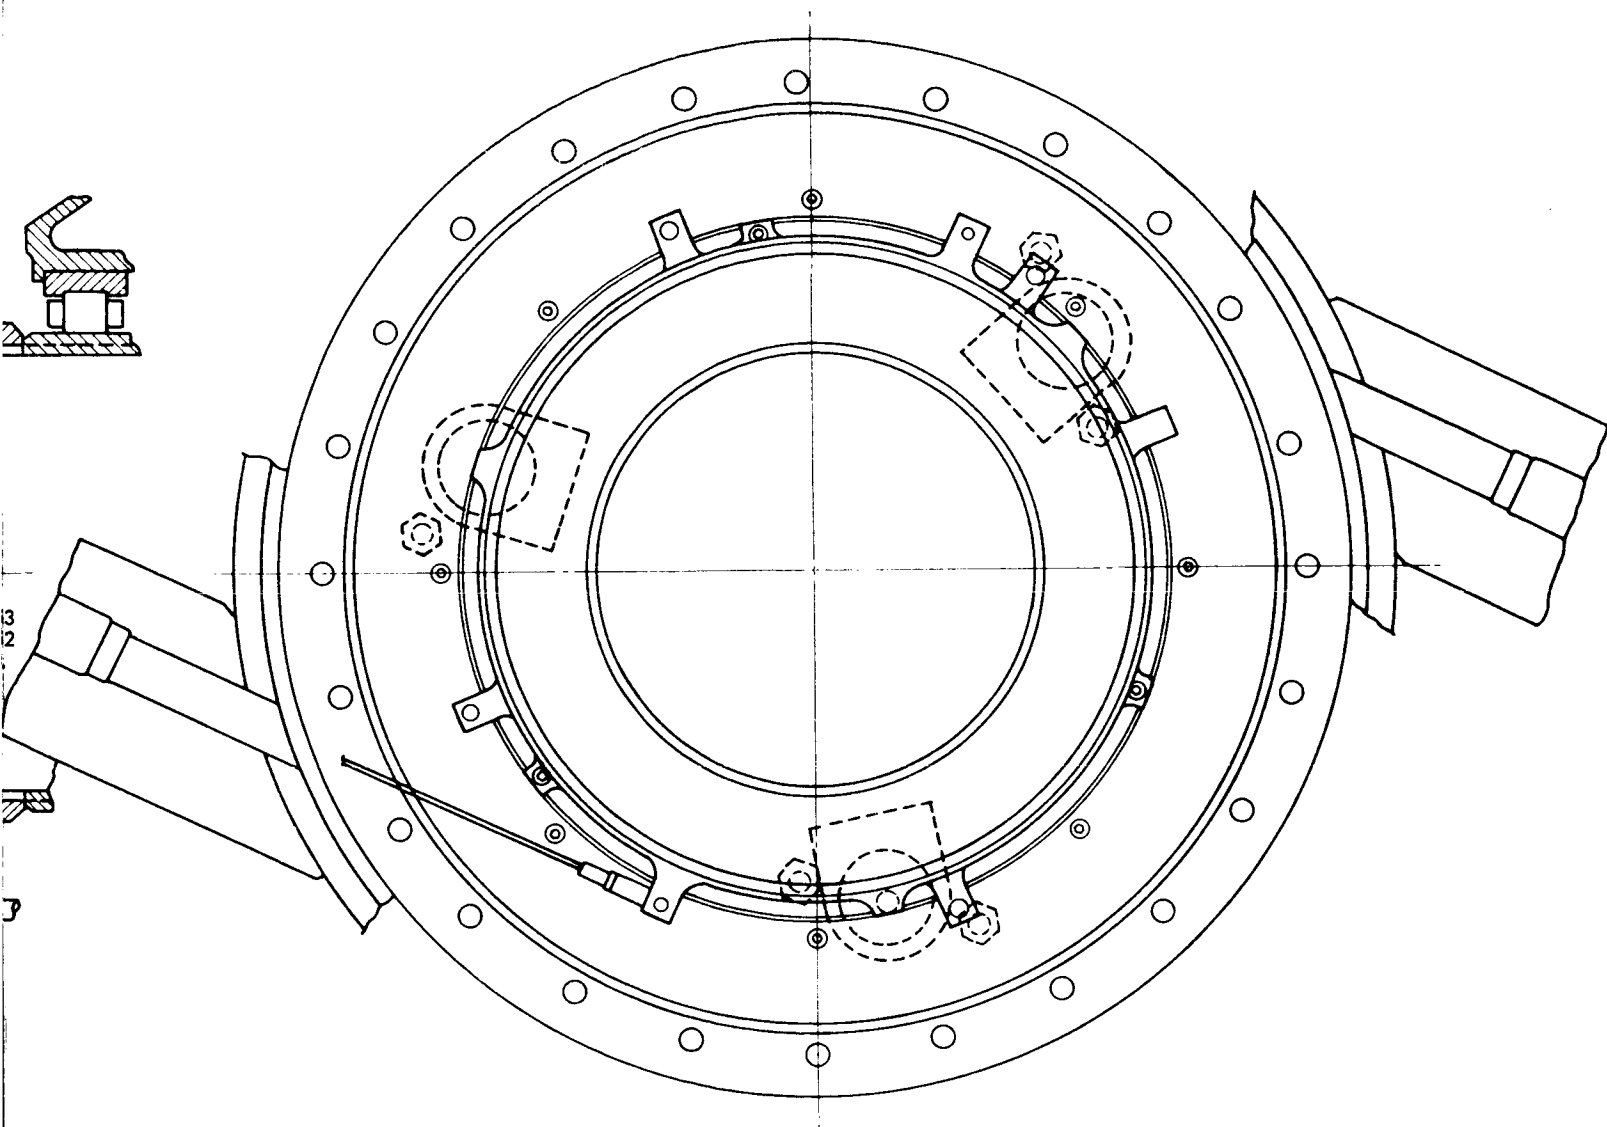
Carbon Face Contact Bellows Secondary Seal Assembly
